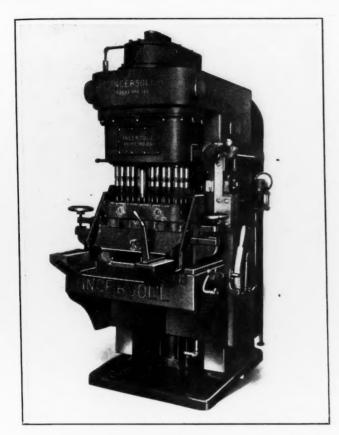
Machine equipped with Twenty-four Spindles for performing
